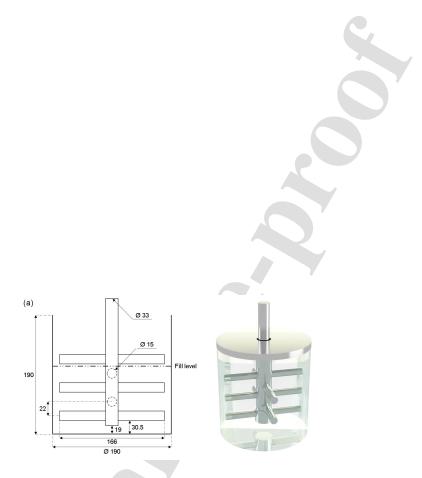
(a) Schematic representation of the mill with all key dimensions marked in millimetres. (b) 3D CAD model of the mill used [40].
